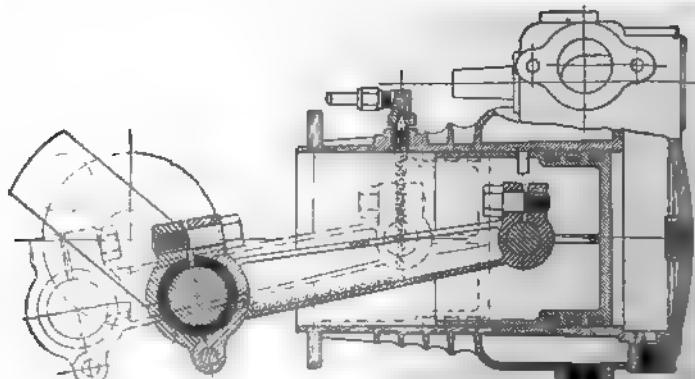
Horizontal Cylinder Oiled by Force-feed Oilier Distributor. The piston is oiled when passing under oil port, as shown by the dotted outline. The connecting rod is longitudinally grooved on the upper surface, so as to carry oil to the bearings.
